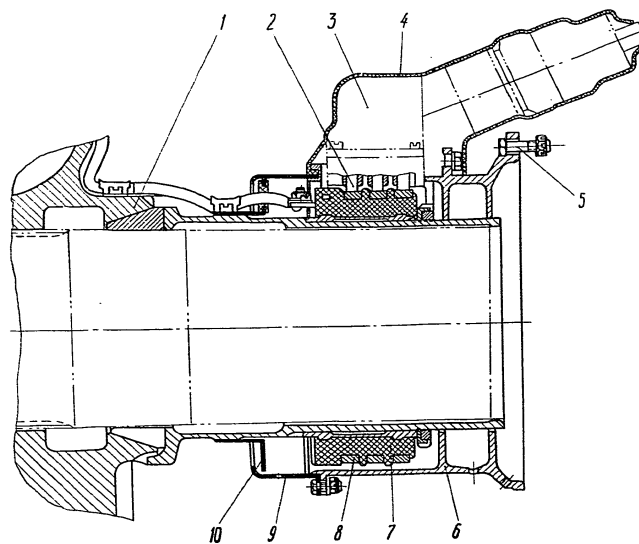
TAIL ROTOR SLIP RING ASSEMBLY
